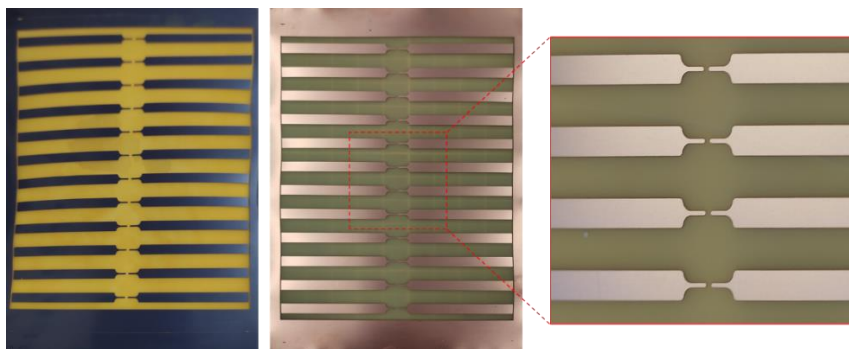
Left) Etched PCB before stripping. Middle) Stripping of the dry film and exposure of the protected copper. Right) Zoom on the track design
